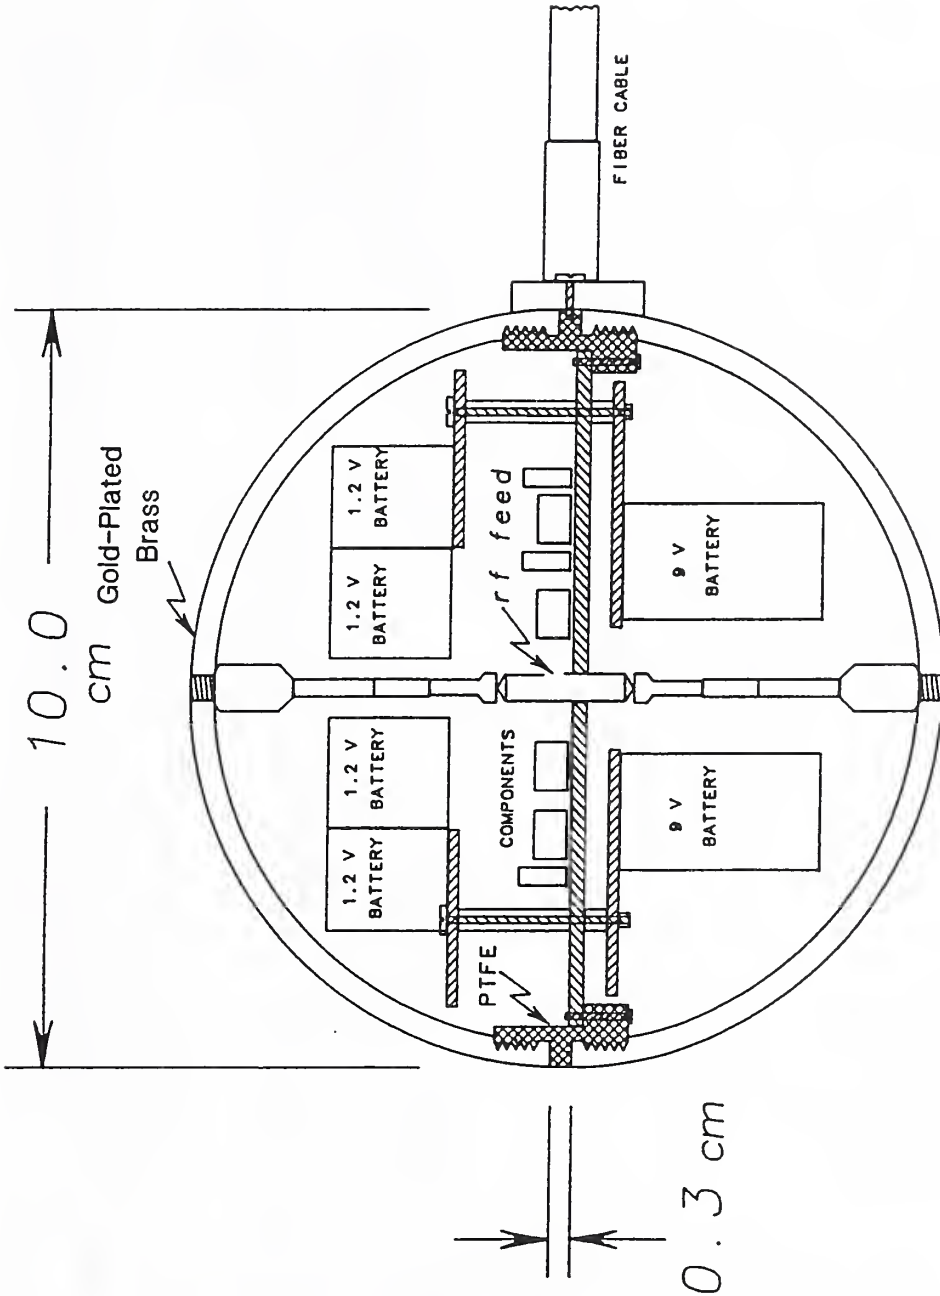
Mechanical drawing of the spherical dipole radiator.
